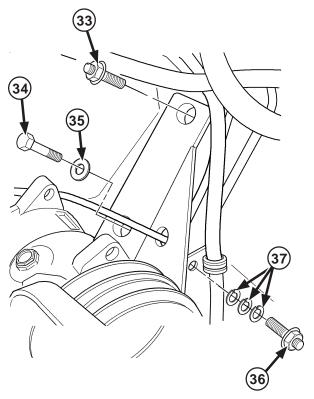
Compressor Mounting Bracket to Cylinder Head
